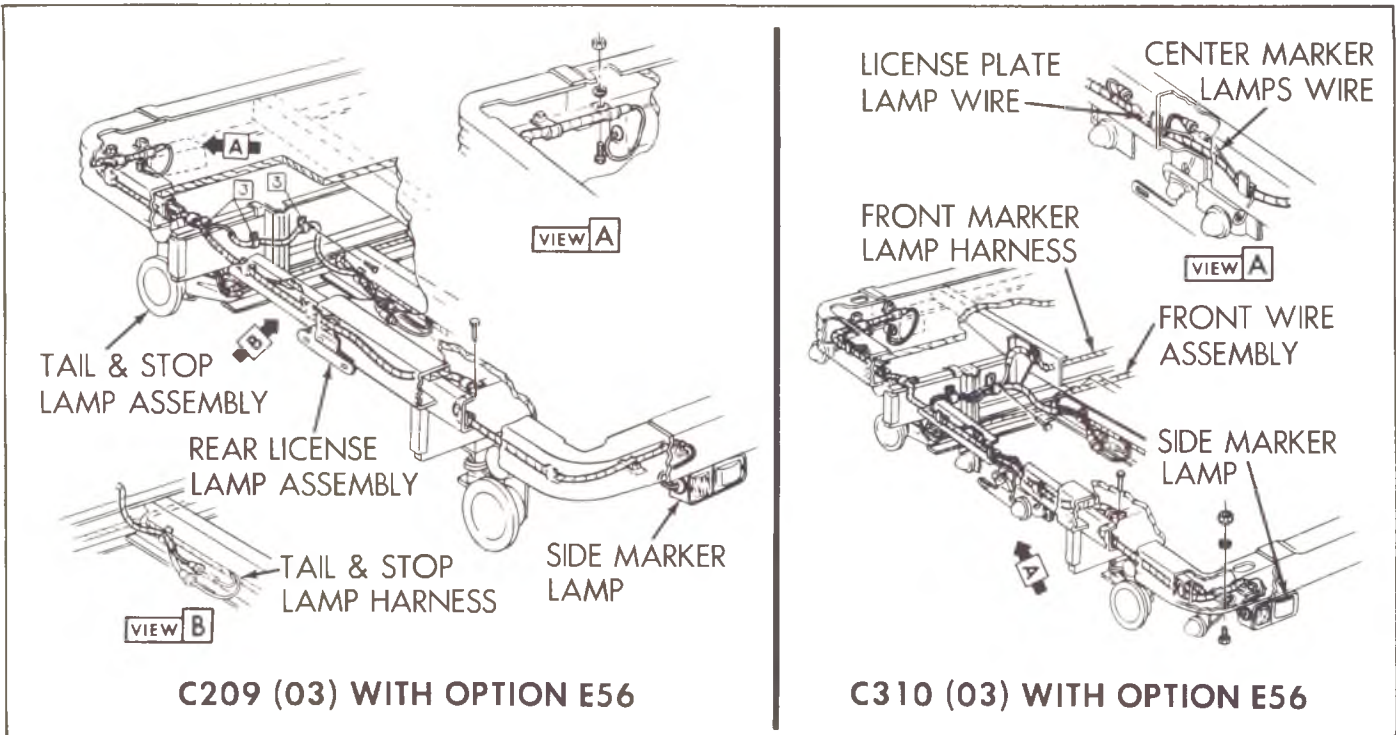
Rear Lighting (C-K Platform and Stake Rack Models)
